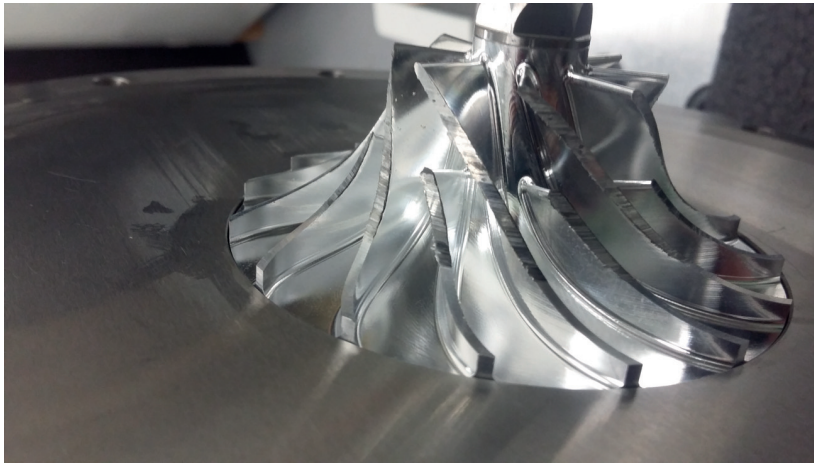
Impeller having a relative clearance ratio of 5 % after touching the collector housing.
